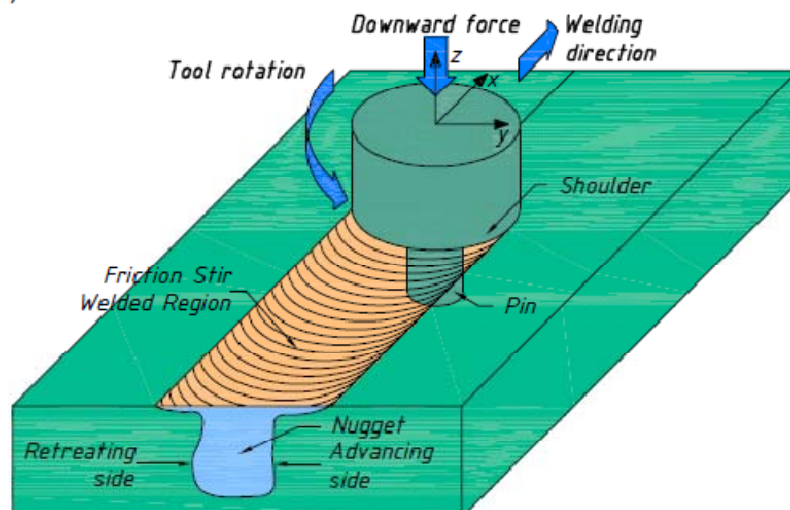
Schematic drawing of friction stir welding
